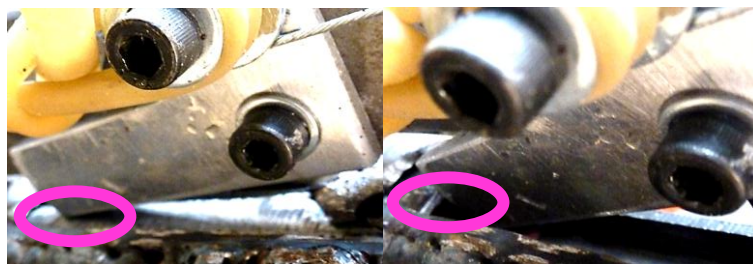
The locking mechanism in action (left: unlocked, right: locked)
